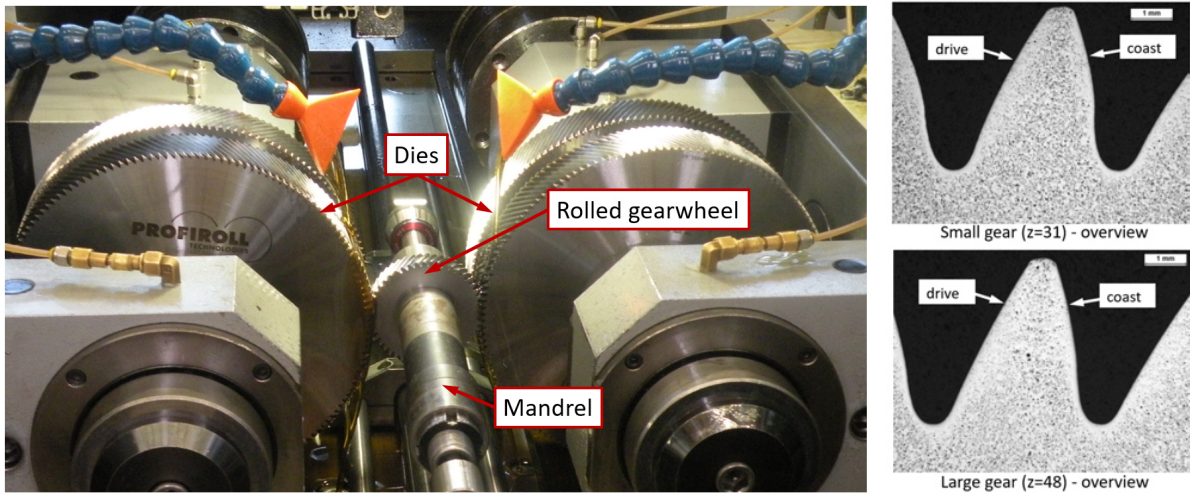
Gearwheel ($z=48$) during the rolling operation in the company Profiroll Technologies (left), structure analysis result from LOM of both rolled gears
